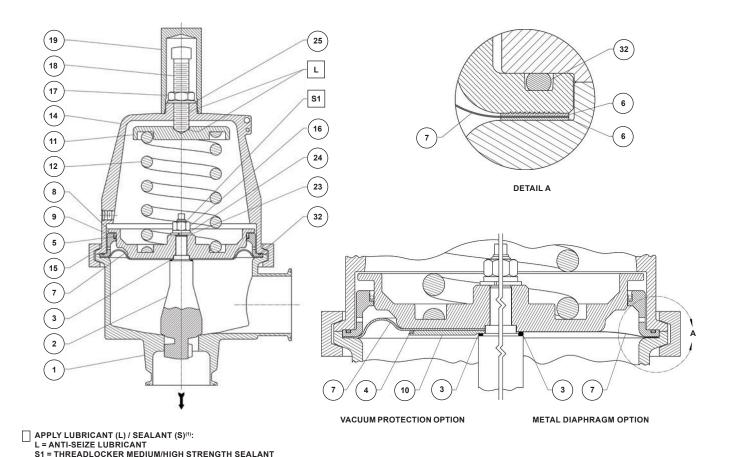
Type SR8 Sanitary Backpressure Regulator Assembly with Pressure Loaded Spring Case 2 and 3 In. / 50 and 80 mm Sizes
